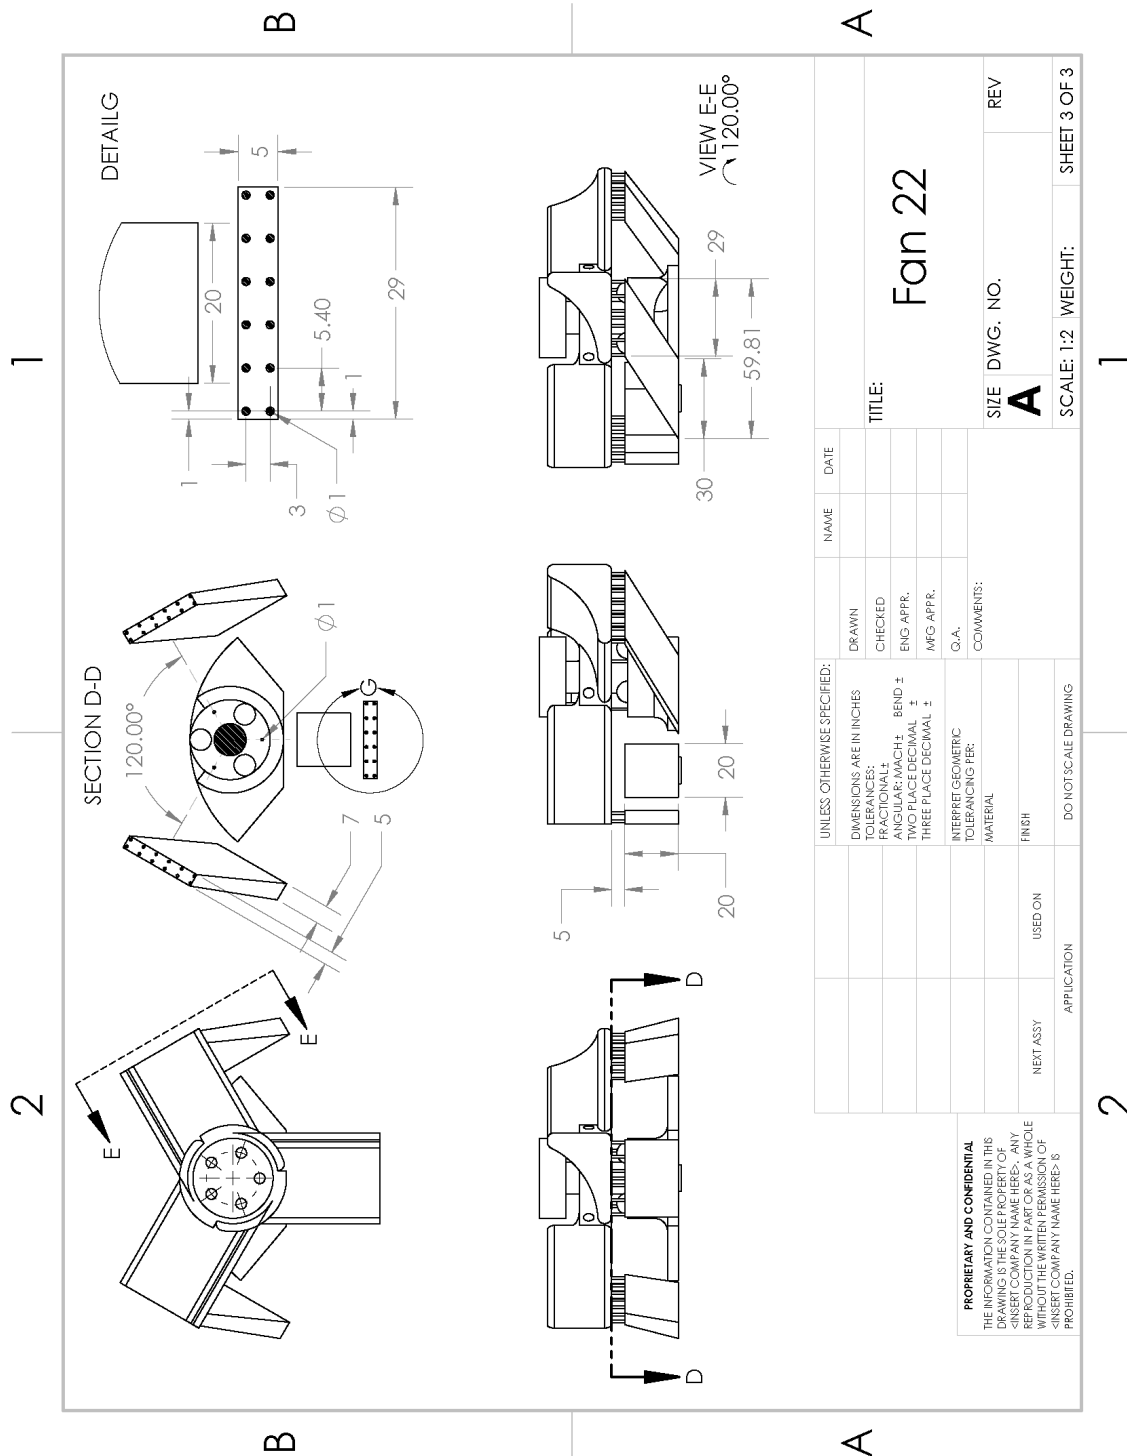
Technical drawing of the spinning flow sensor device, page 3.
